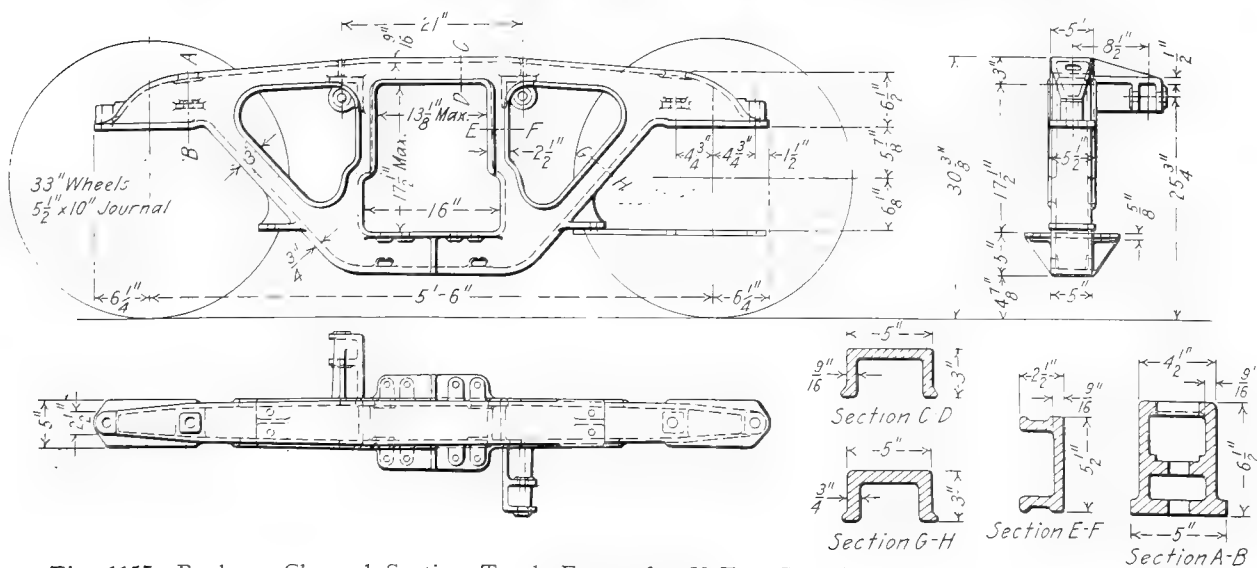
Buckeye Channel, Section Truck Frame for 50-Ton Capacity Freight Cars. Buckeye Steel Castings Company.
